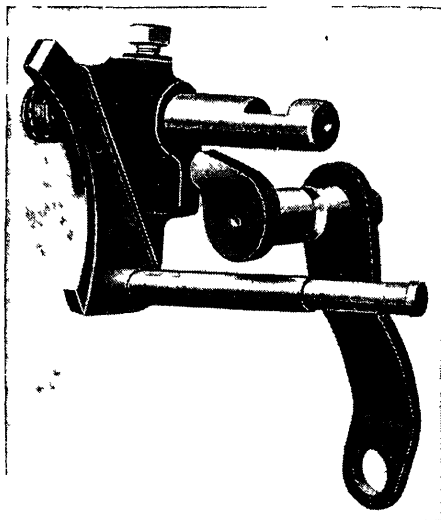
Relationship of shift mechanism as it appears when assembled in case
